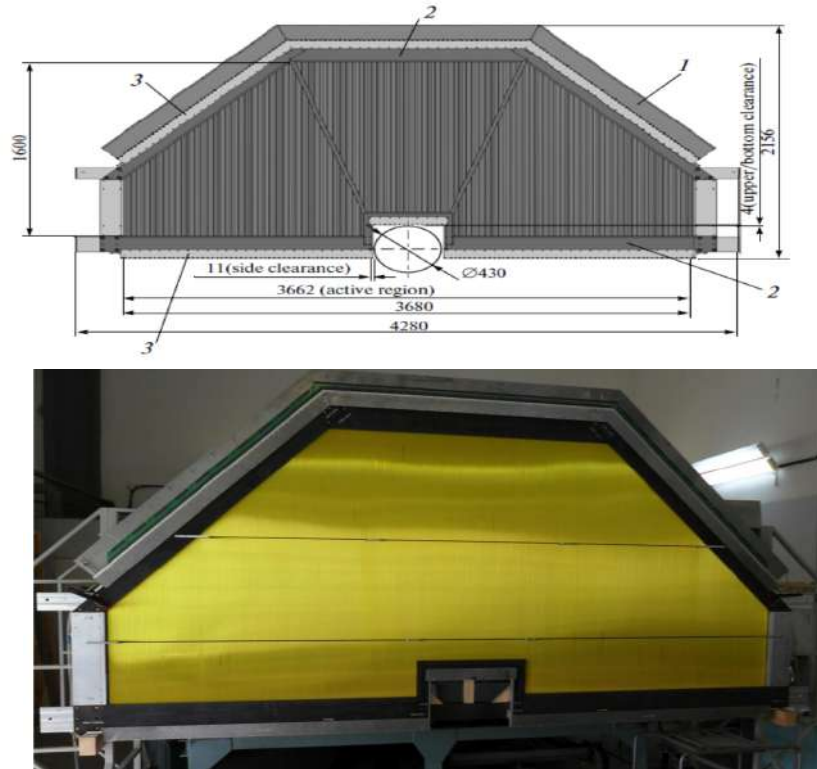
(Top) Schematic view of the MUCH straw module. 1-mother boards for the readout and high voltage supply of the straw anodes; 2-carbon plastic elements, and 3-Al elements. (Bottom) Picture of the straw module assembly. (The Figure is adopted from Ref. [39])
